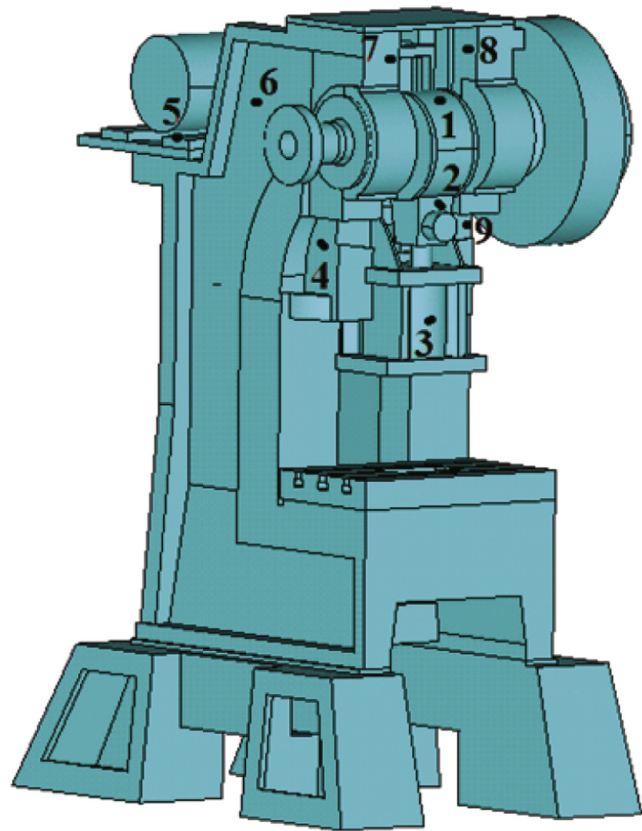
Model of the high speed press system. 1 – upper part of linkage, 2 – lower part of linkage, 3 – middle part of slider, 4 – left part of rail, 5 – motor, 6 – upper part of press frame, 7 – upper part of left bearing, 8 – upper part of right bearing, 9 – right part of rail.
